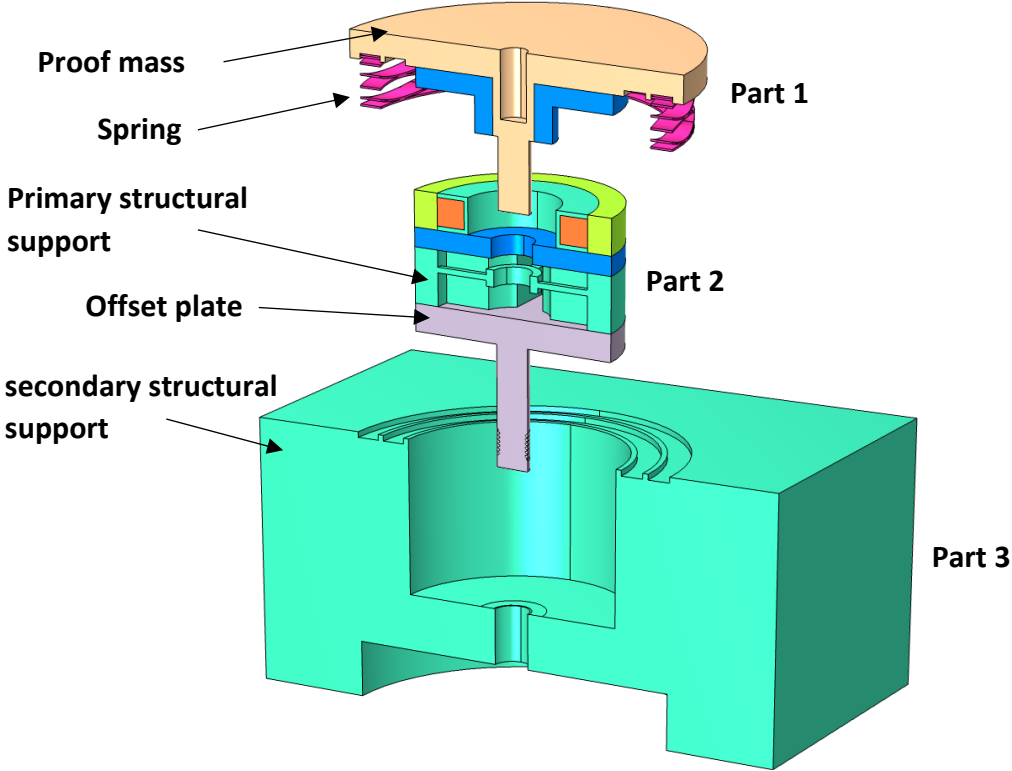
Exploded diagram of prototype. Top: Part 1 consisting of proof mass, spring and core component. Middle: Part 2 consisting of magnet, coil, core component, offset plate and support structure. Bottom: Part 3 is used as support structure.
